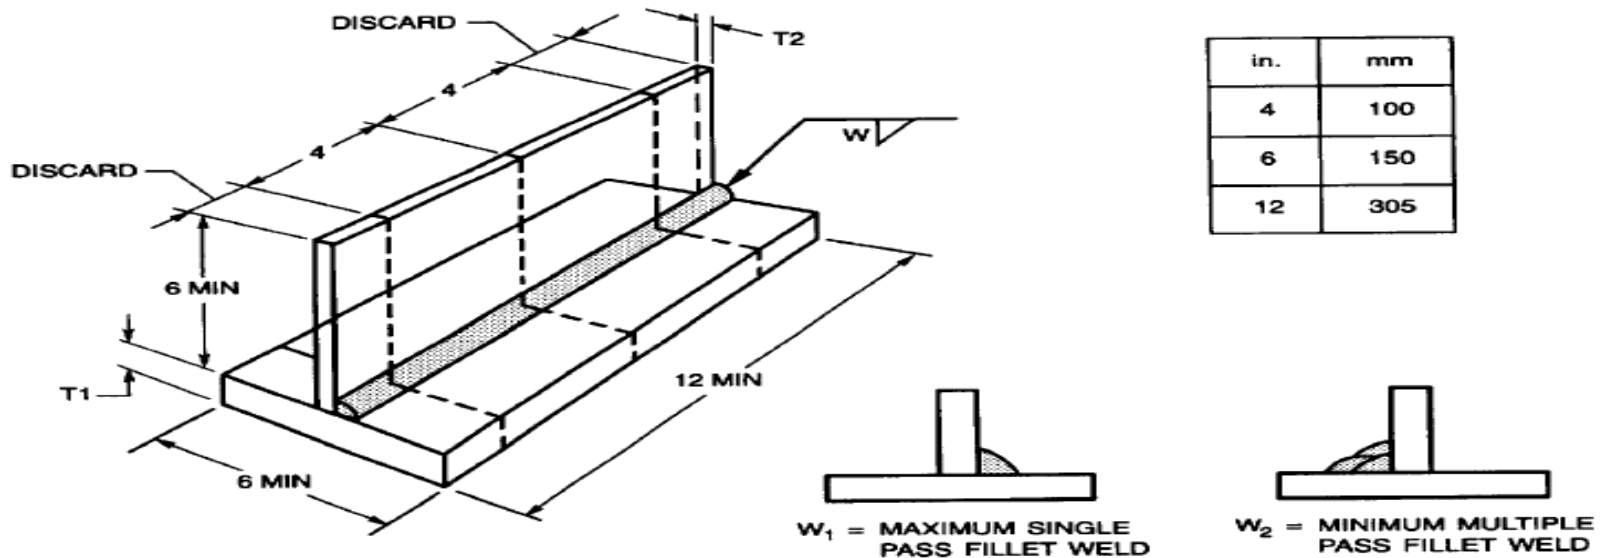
Location of Fillet Weld Shear Test Specimens
